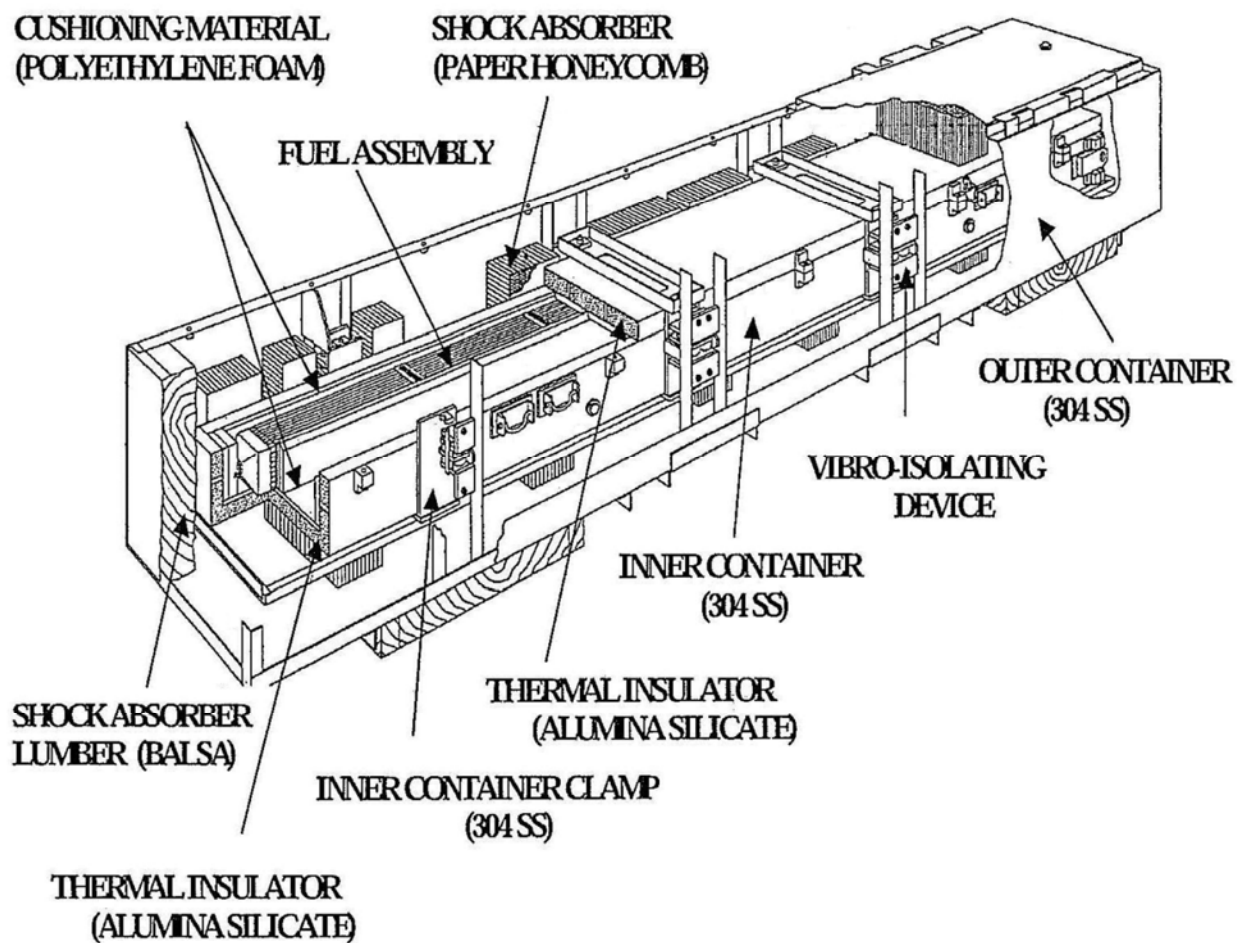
TN-B1 PACKAGE ASSEMBLY
